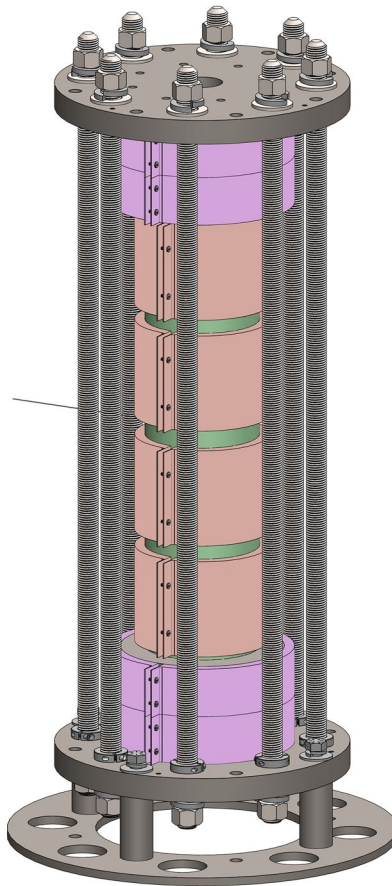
Remainder of threaded rods installed (shaft collars not removed yet).
